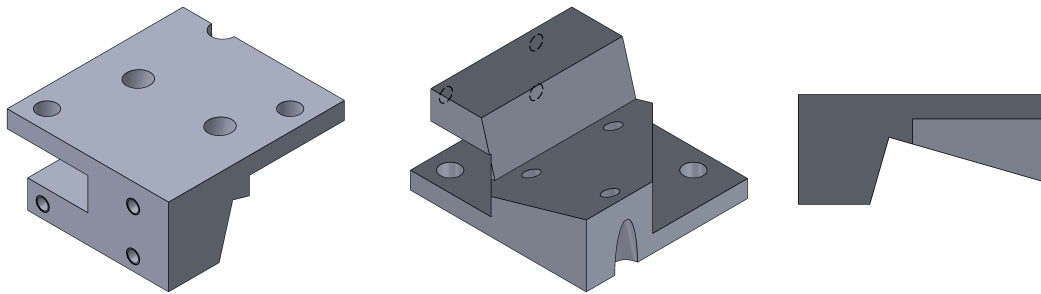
The connection piece that holds the main knee and ankle cylinders together
